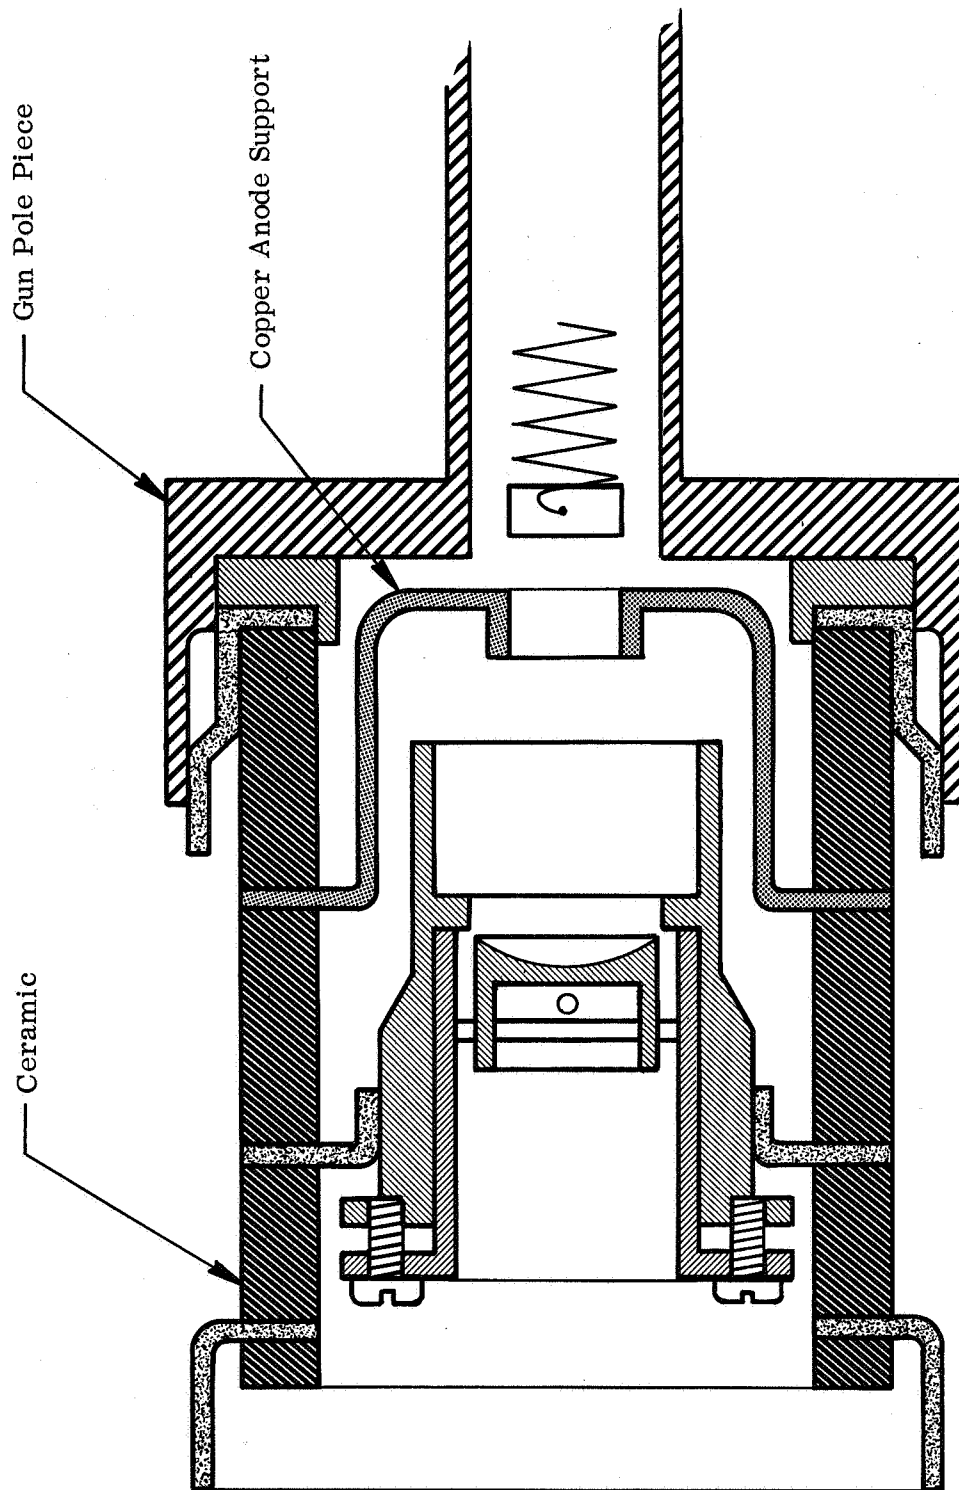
Sketch of mechanical gun design used on the WJ-395.
